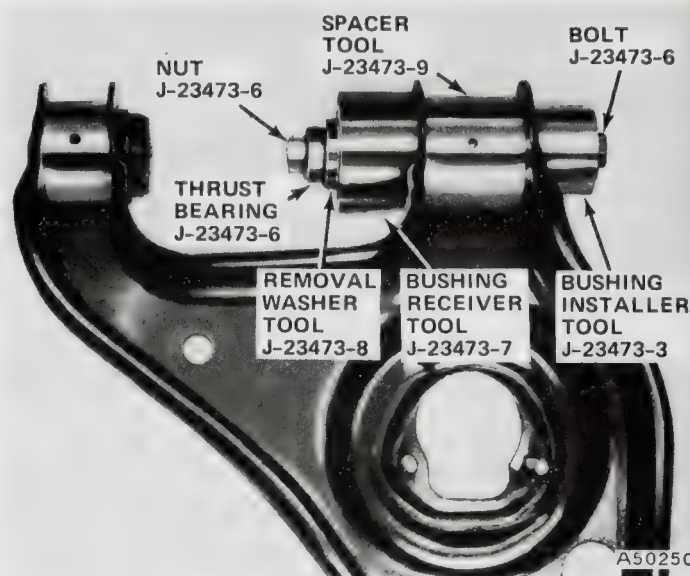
M-46 Lower Control Arm Front Bushing Installation
